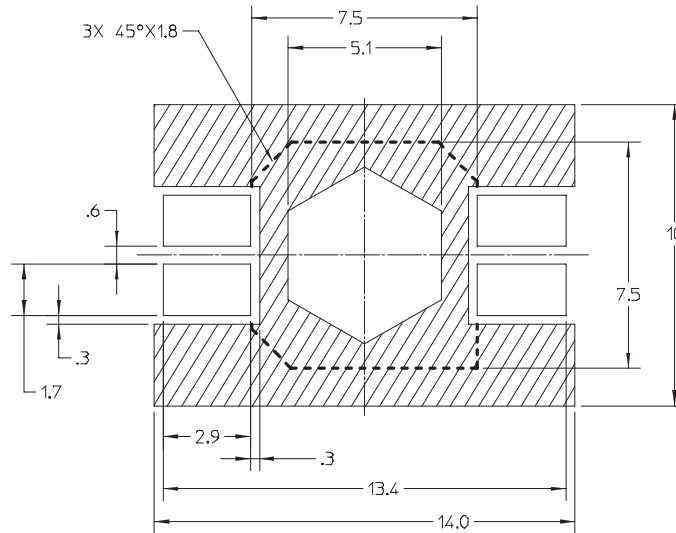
4-Lead Gullwing Package Solder Pad Layout.
